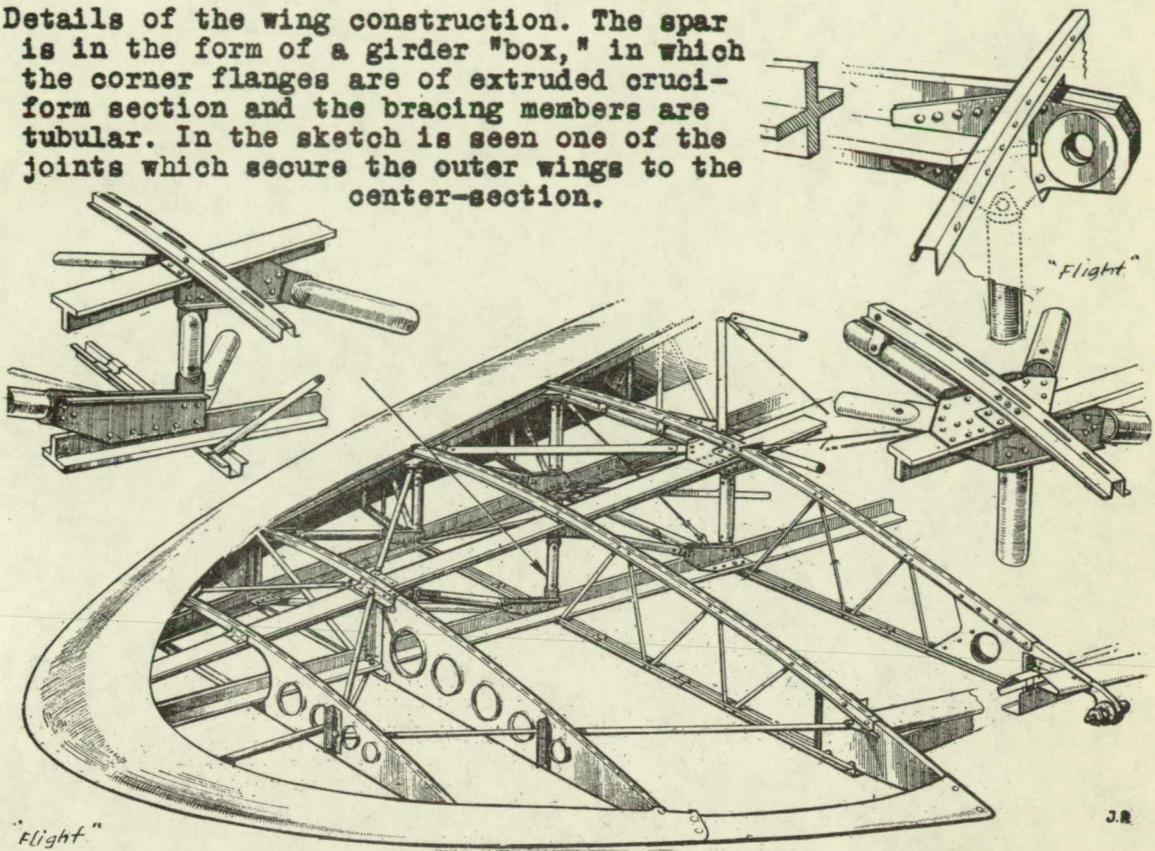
Details and assembly of wing structure. The Short Scion Senior
